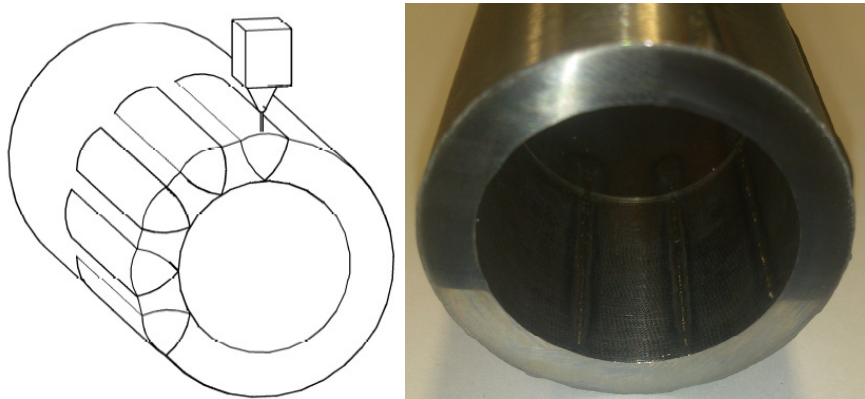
Flow-sheet of welding process and roots of welded pipe.
